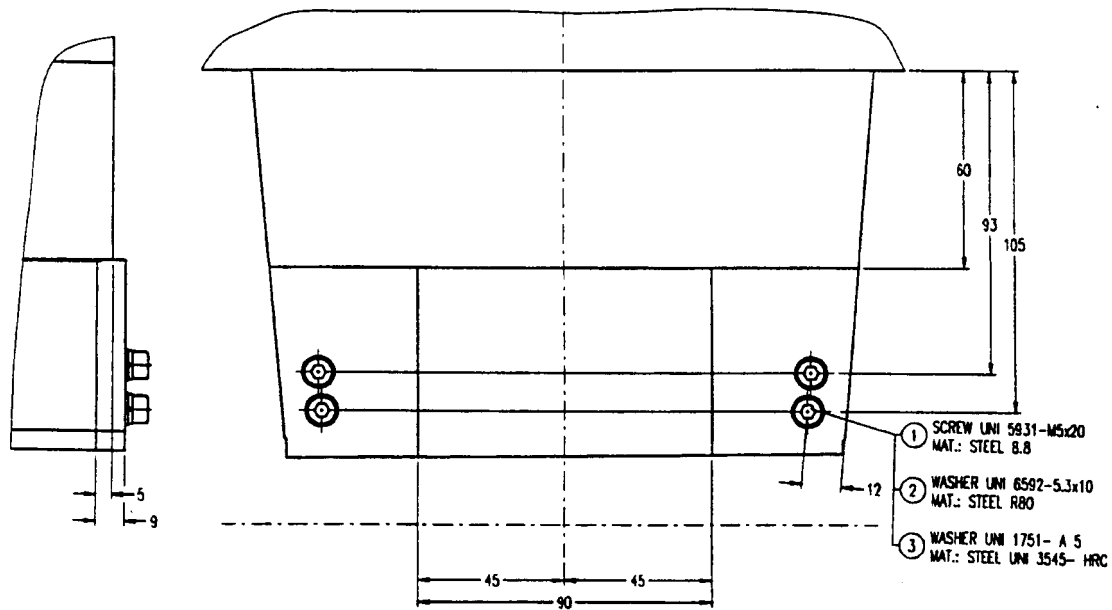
Final configuration of removable end cap with 5 mm cut and shim 1.
